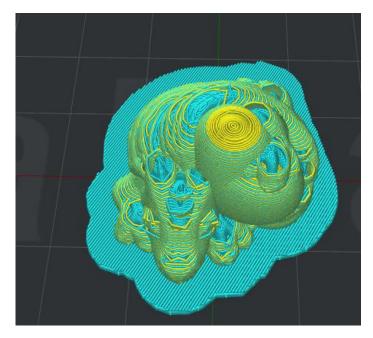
Set "Wipe Wall Angle" to be 90.
